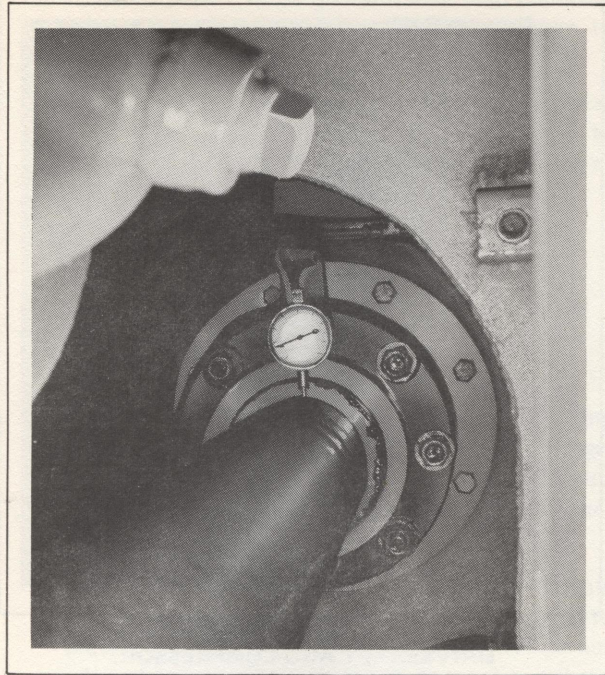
INDICATOR MOUNTED ON COMPRESSOR COUPLING.
